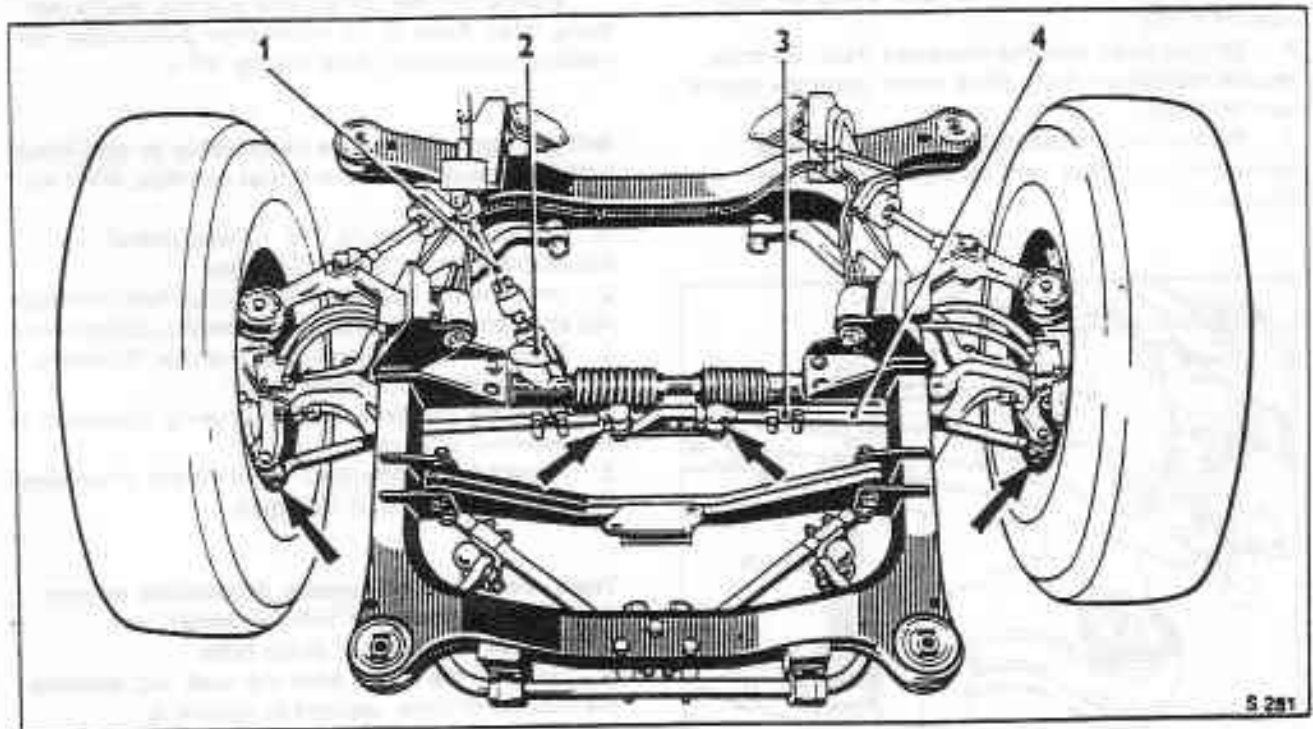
Steering linkage (Applicable to cars fitted with replaceable ball-pin units)
